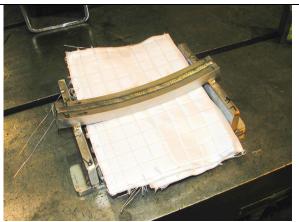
Weld Sample 1- Cross Sectioned
